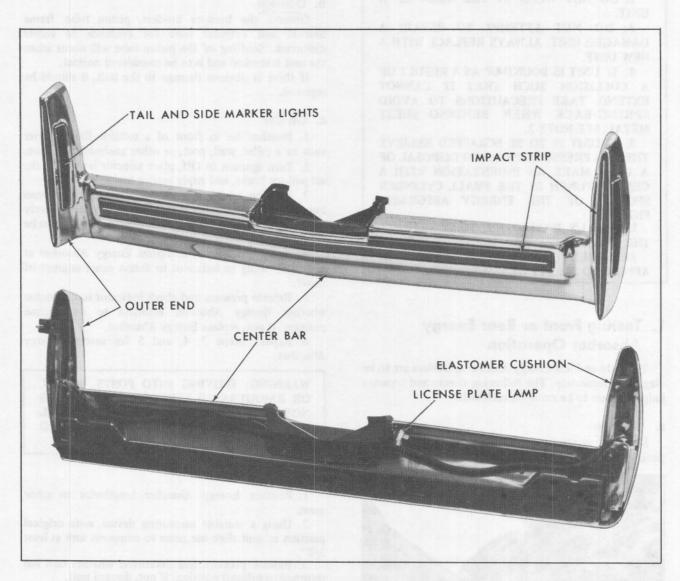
Rear Bumper Assembly—Except Eldorado
